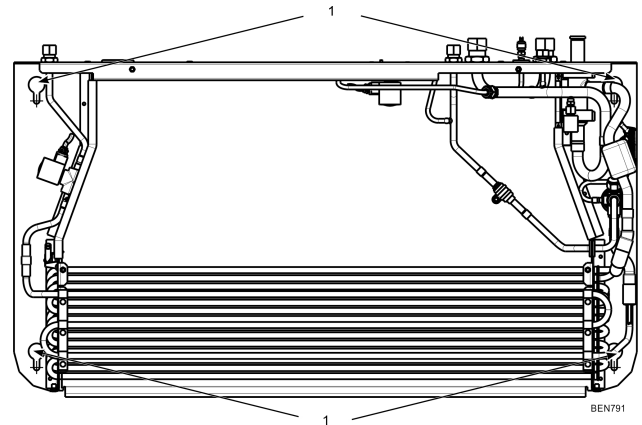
ES Evaporator Mounting Bolts (Cover Removed)
